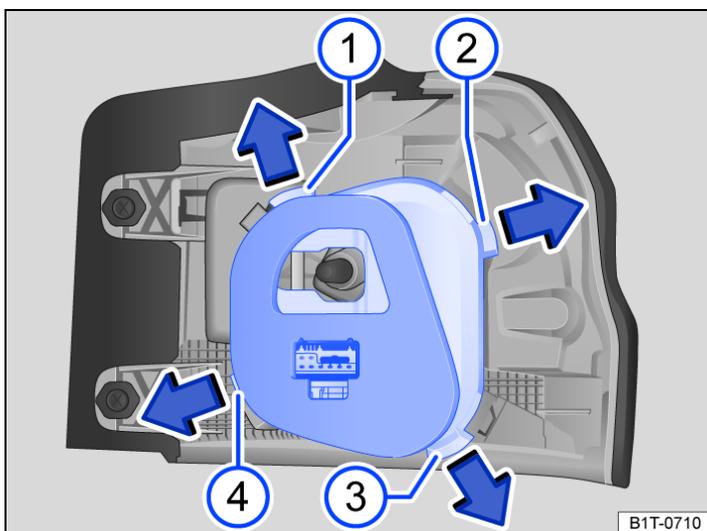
Taillight in the vehicle body: removing the bulb holder.
